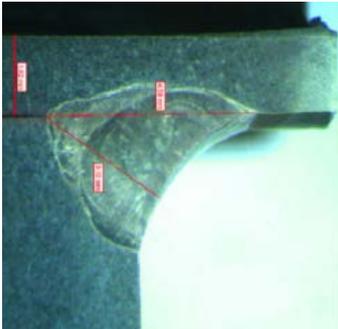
Proven weld preparations of the tubesheet for flush tubes
